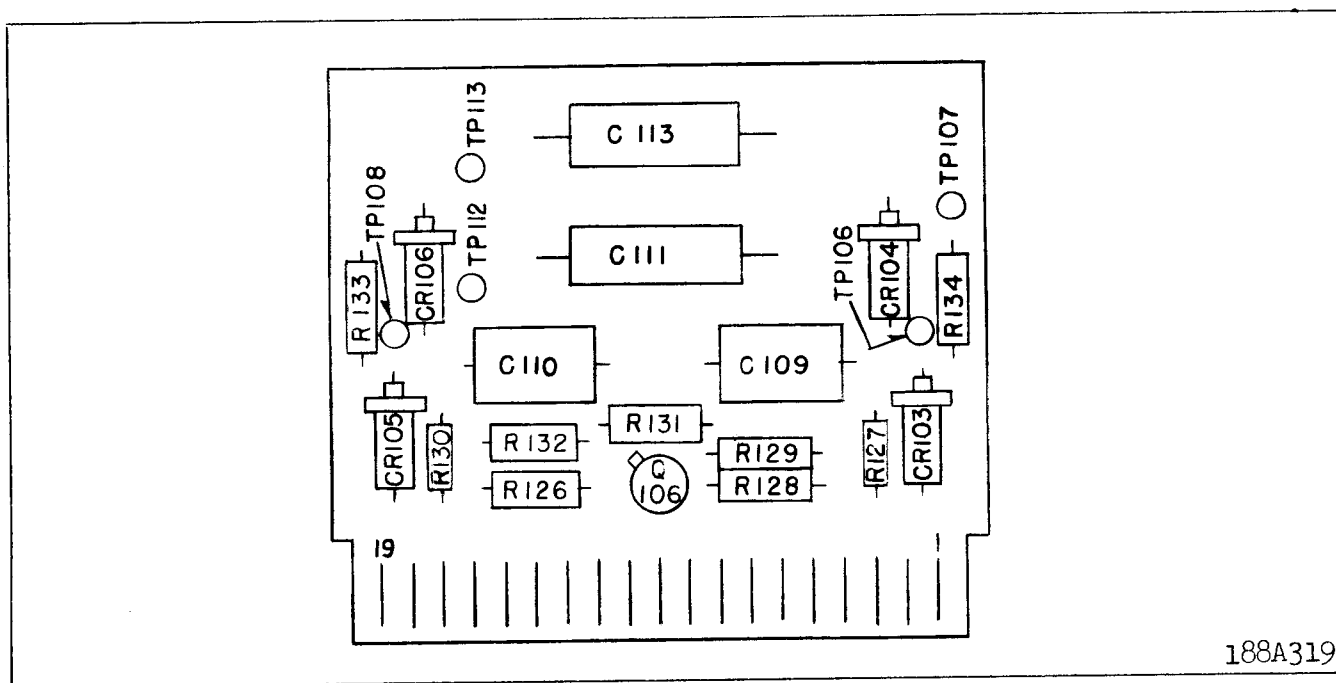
Power Amplifier Printed Circuit - Parts Location
